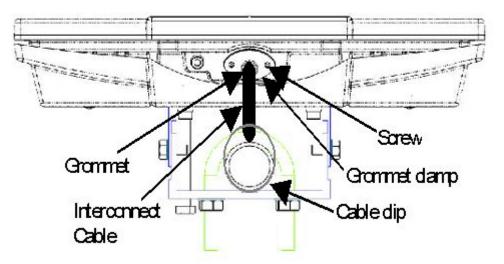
Interconnect Cable Installation to Outdoor AB-Extender - Bottom View
